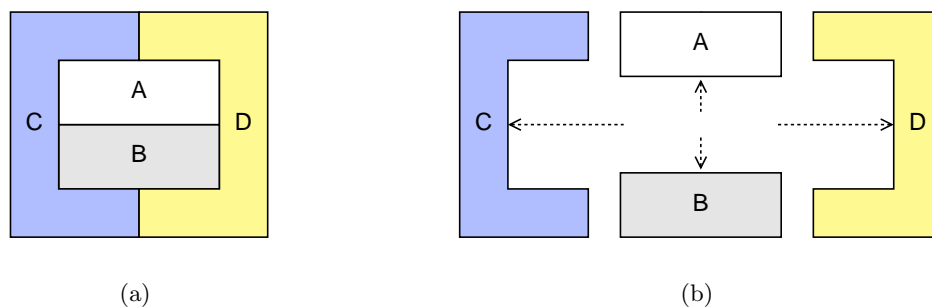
(a) A simple assembly consisting of four parts. (b) Each part in the assembly can be accessed and removed over time using only straight-line translating motions.
